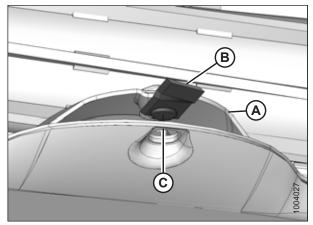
Discblade Aligned with Hole in Rock Guard
